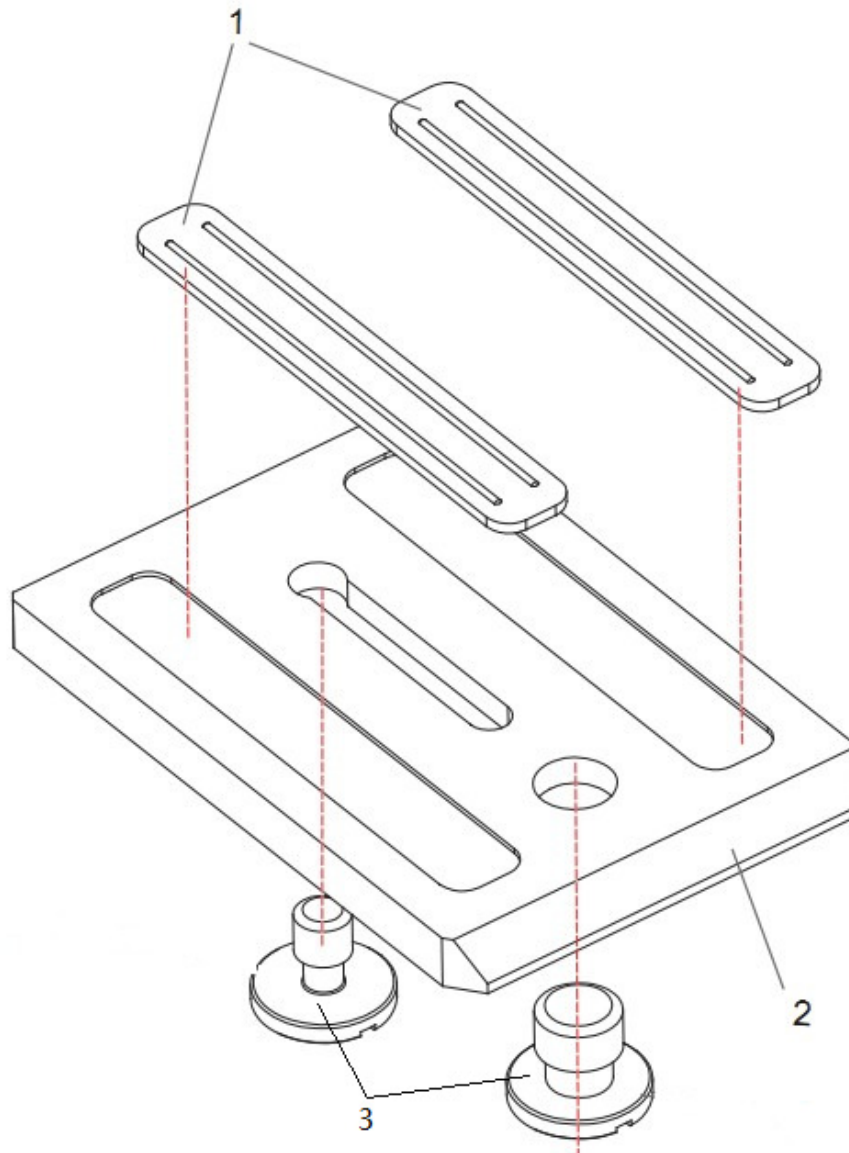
REACH PLUS 5 Fluid Head —Wedge Plate Unit Assembly
